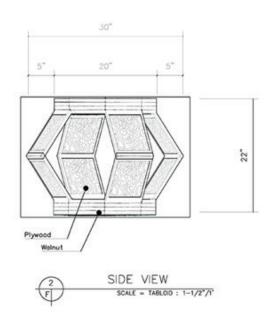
Drawing of an Abstract Furniture Design
